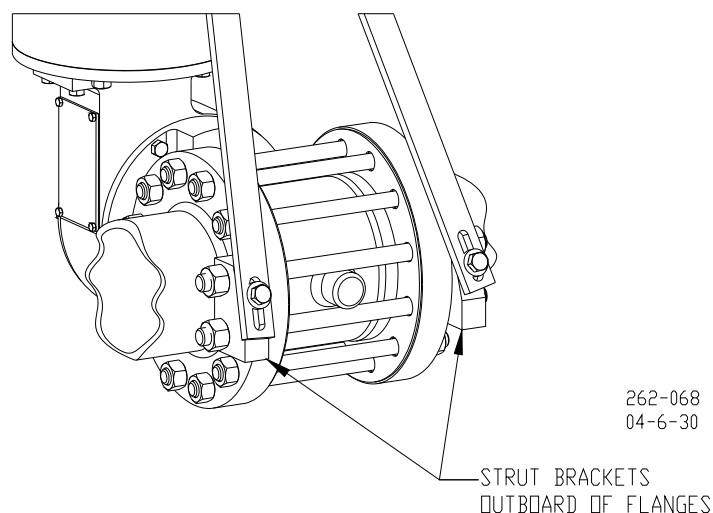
Close-up of Strut Brackets on Pipe Flanges (Flangeless Version)
